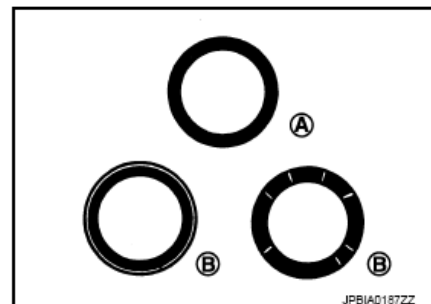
Identifying Proper And Improper Valve Seat Contact
